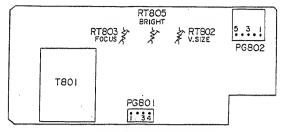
Electronic Viewfinder Circuit Board (Components Side)
